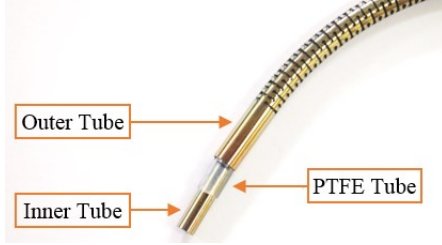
Assembled shape of grooved tube with PTFE tube. The PTFE tube was used to reduce the inter-locking between the inner and outer grooved tubes.
